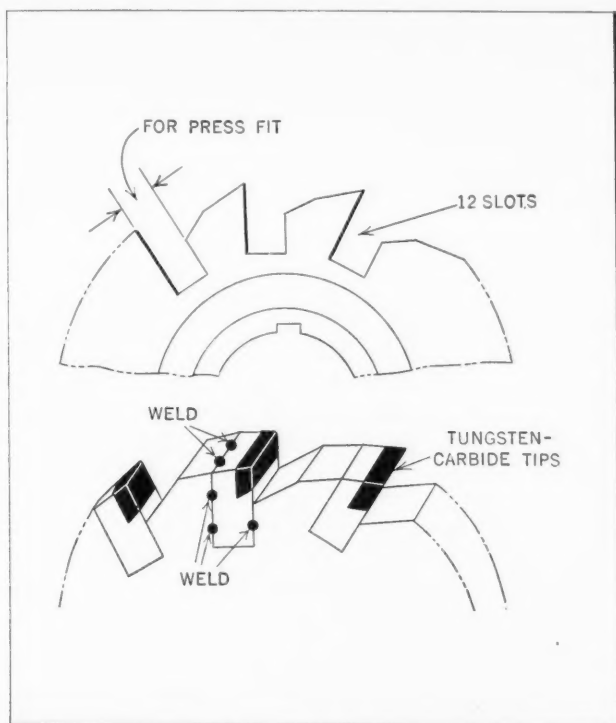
Design of Cutters Having Blades that are Tack-welded to the Body
